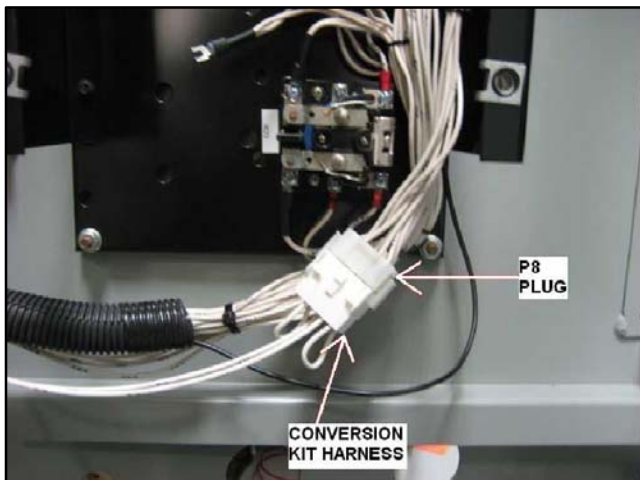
Connect Conversion Kit Wire Harness GM69403 to Plug P8
